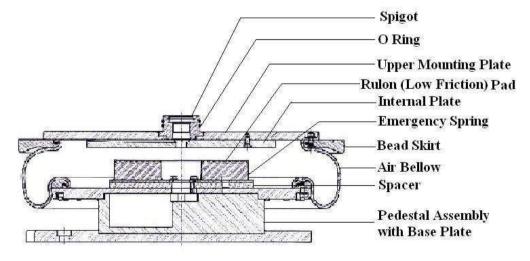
Air Spring Assembly With Internal Emergency Spring
